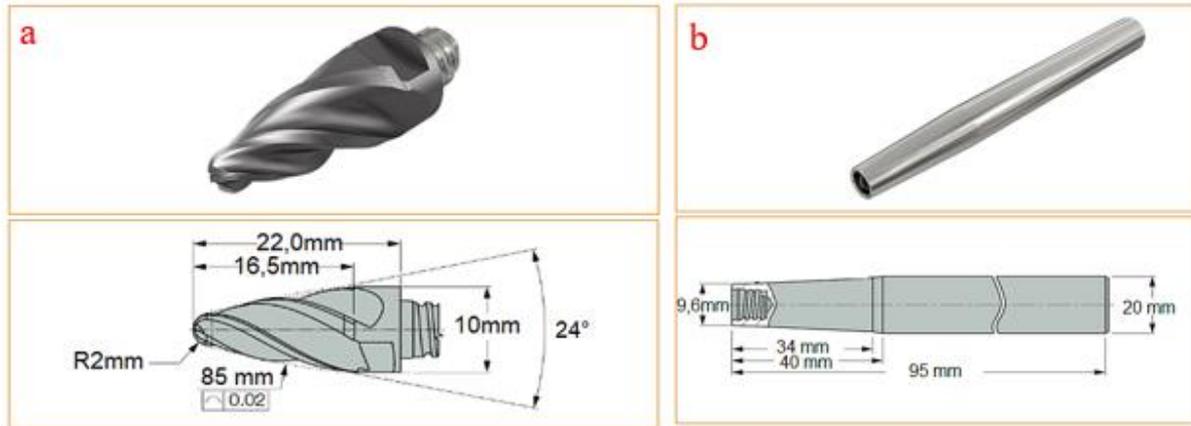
Barrel end mill: (a) Dimensions. (b) Conical shanks for interchangeable milling heads (Adapted Iscar, 2023).
